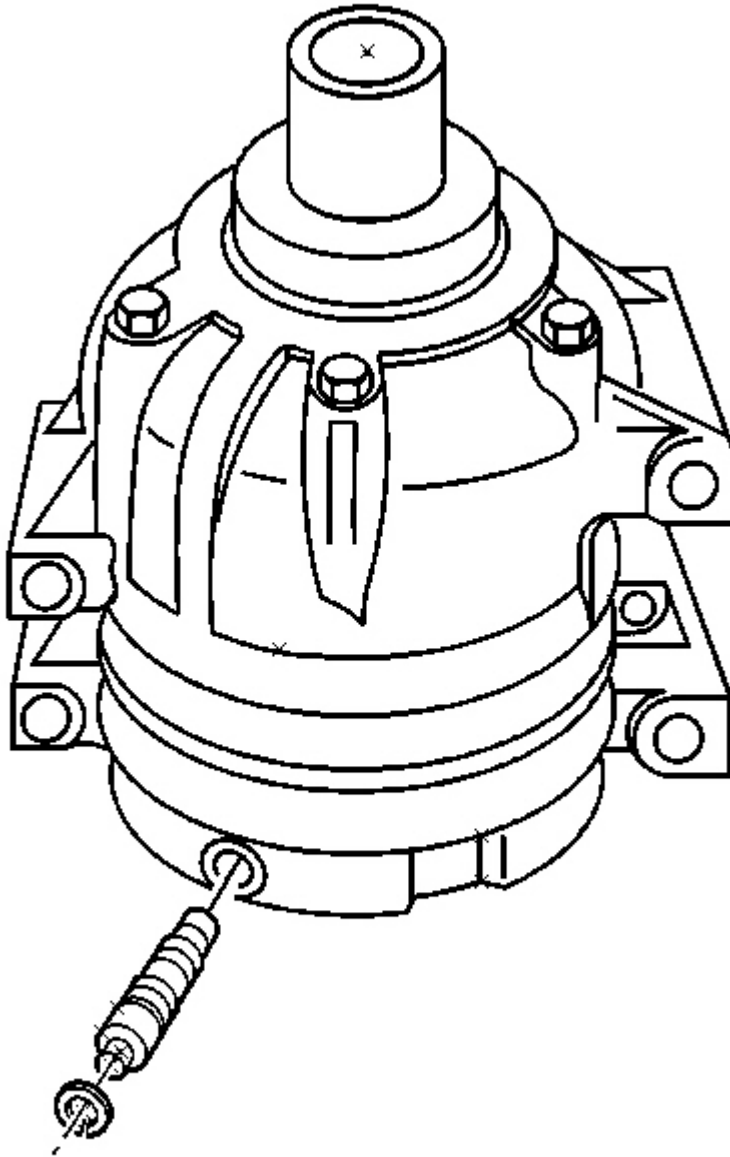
A/C Compressor Control Valve & Retaining Ring
